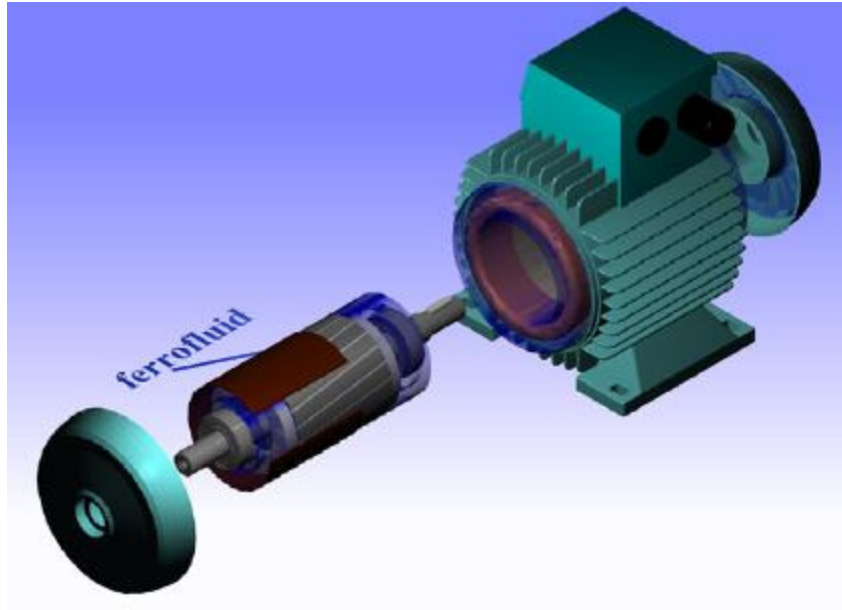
Nethé, Et al. Rotating Permanent Magnet Machine CAD model [9]. This figure shows the CAD model for the second experiment from Nethé, et al., which featured a rotating permanent magnet machine.
